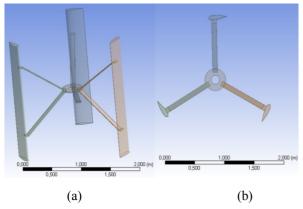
3D model of investigated wind turbine: (a) side view; (b) top view
